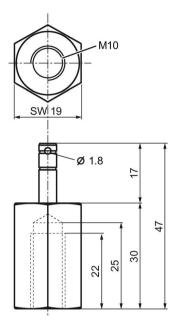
Dimension drawing of quick change holder 6GT2690-0AH10
